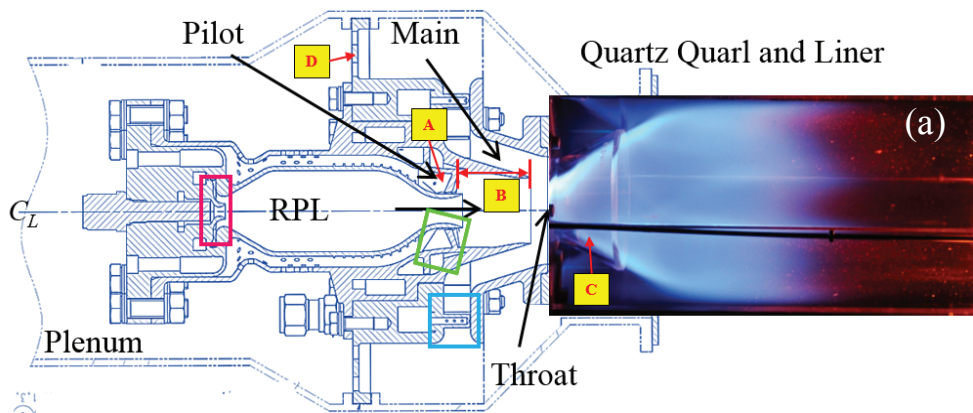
Combustor and DLE Burner (Generation 1) for SGT-750 engine [53].
